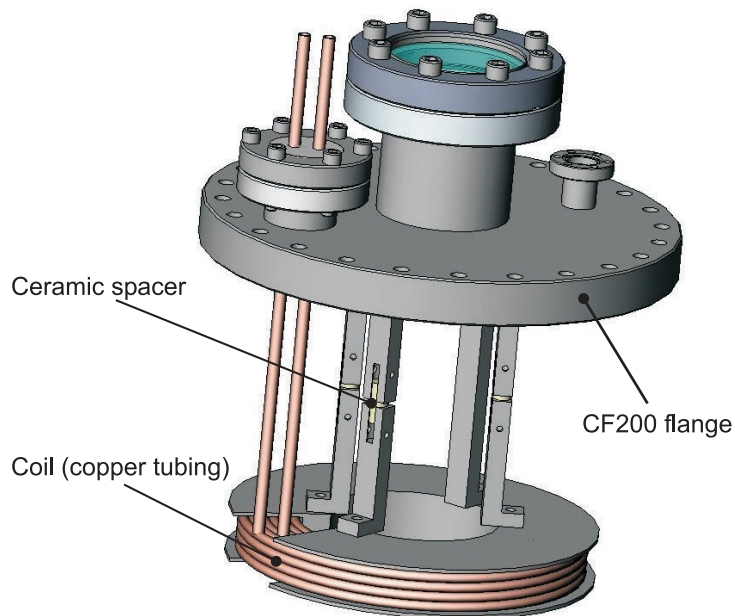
CAD-rendering of a MOT-coil assembly.
